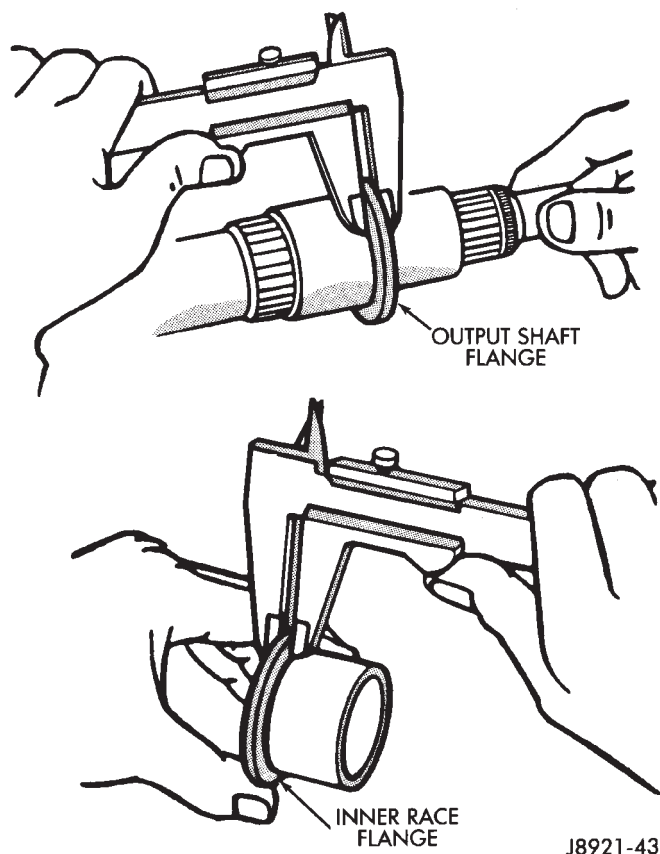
Check Shaft And Bearing Race Flange Thickness
